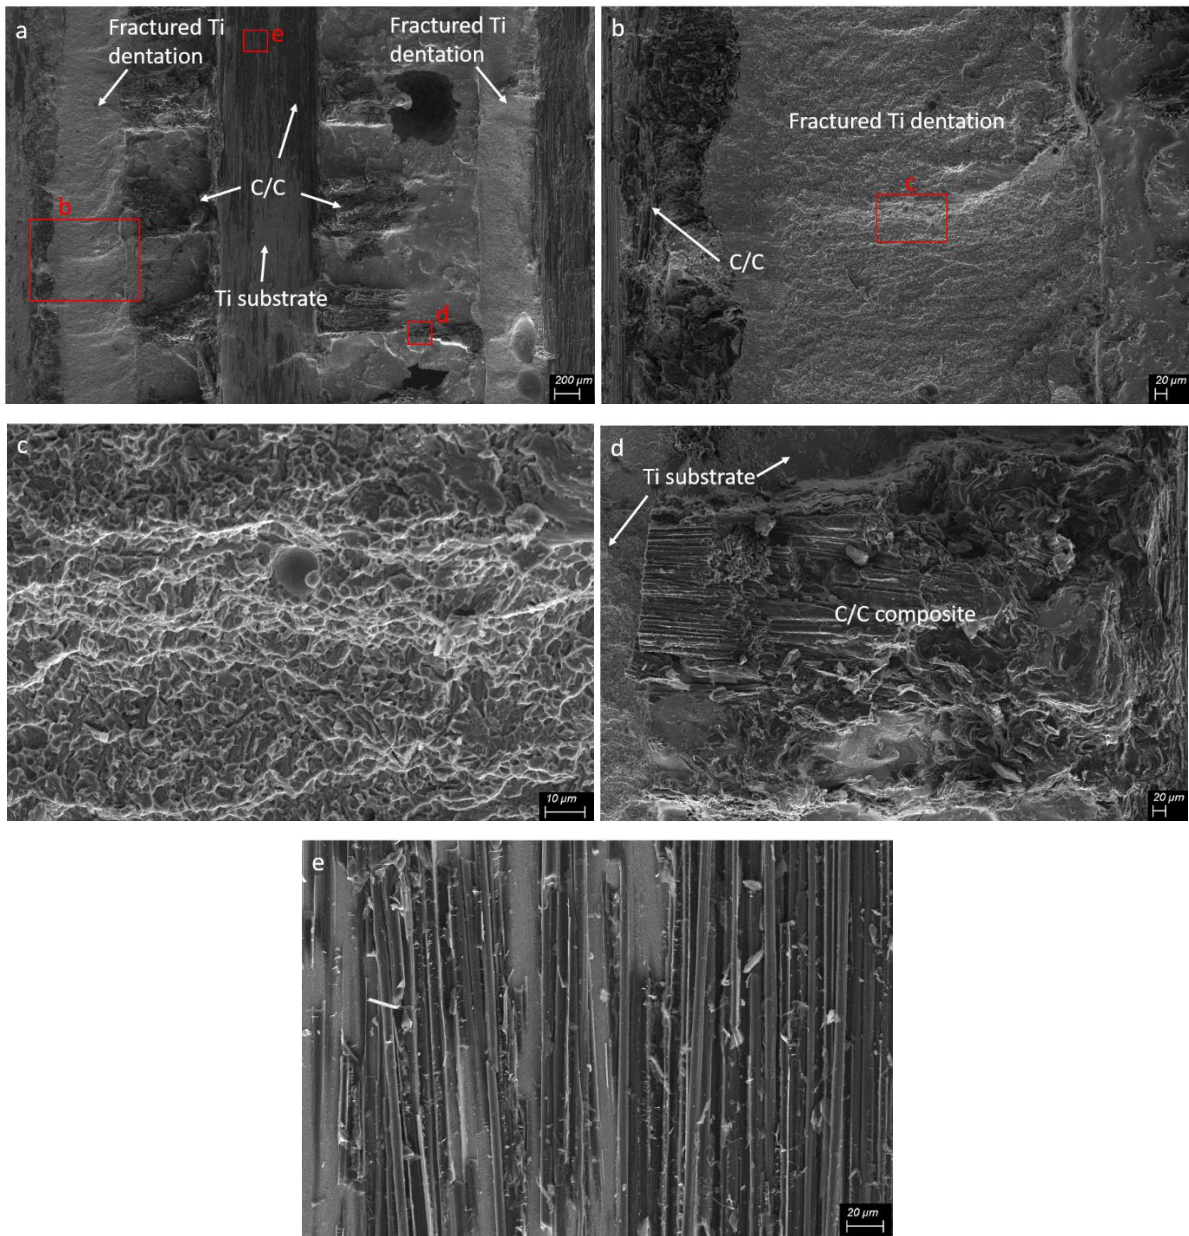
Typical fracture surfaces of the 3D C/C composite-Ti6Al4V joints on the Ti6Al4V sides for the joints with the groove depth of 3 mm.
